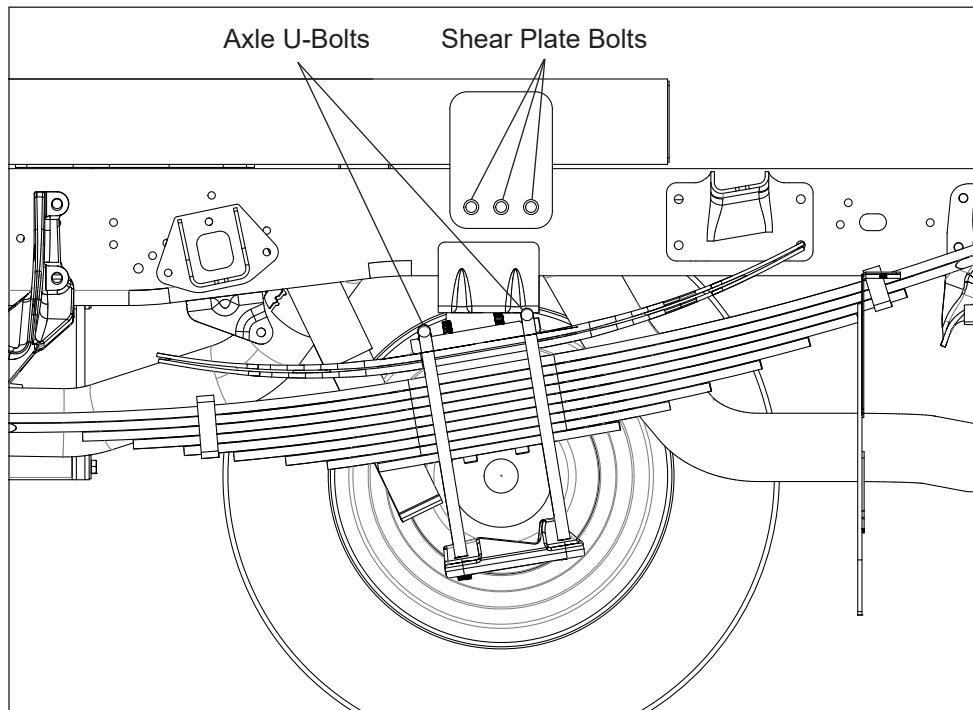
Shear Plate Bolts Located Above Axle U-Bolts
